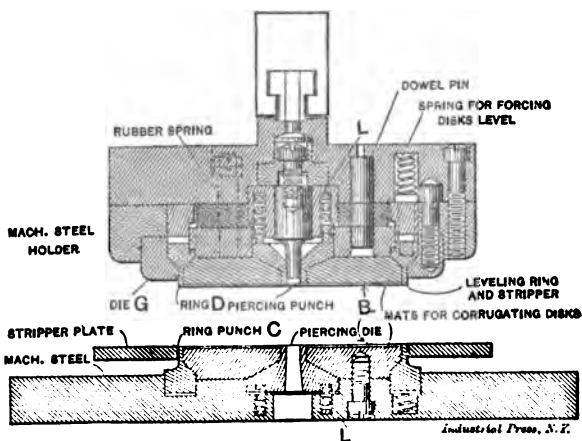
Vertical Section through Sub-press Die shown in Fig. 76
